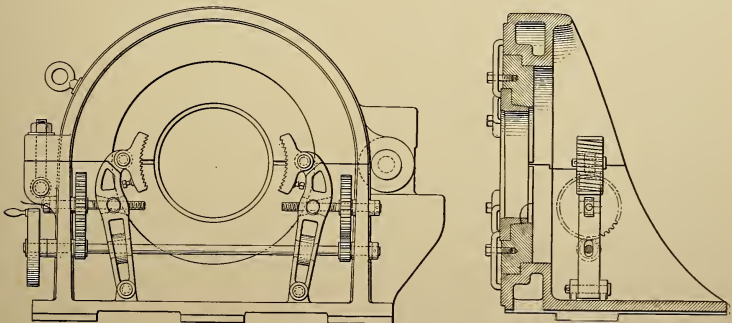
HEADS FOR HOLDING PIPE AND FLANGE DURING EXPANDING PROCESS WITH LARGE SIZES.
